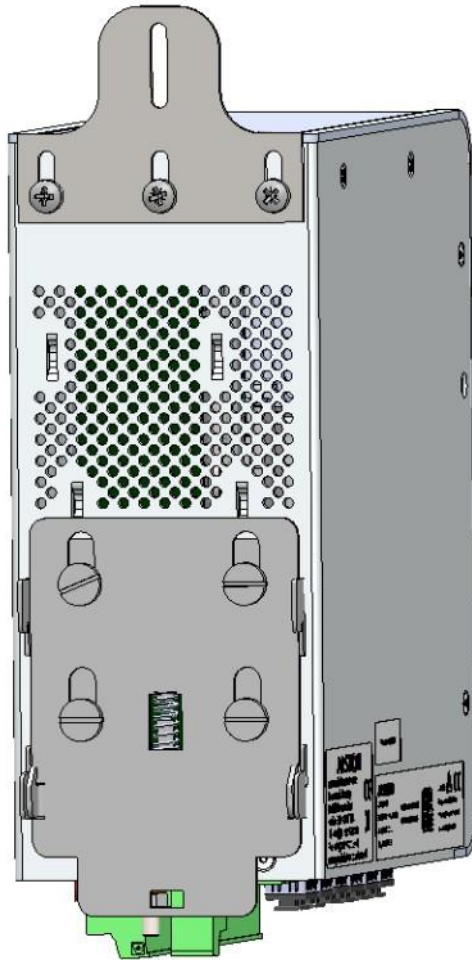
Reason H49 DIN Rail Mounting Details - Rear View with Mounting Rack
